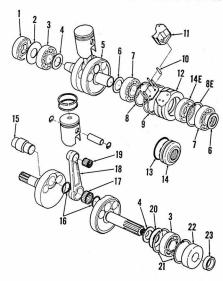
Exploded view of the crank-shaft assembly. Parts (8E & 14E) should be discarded if later type seal (13 & 14)
